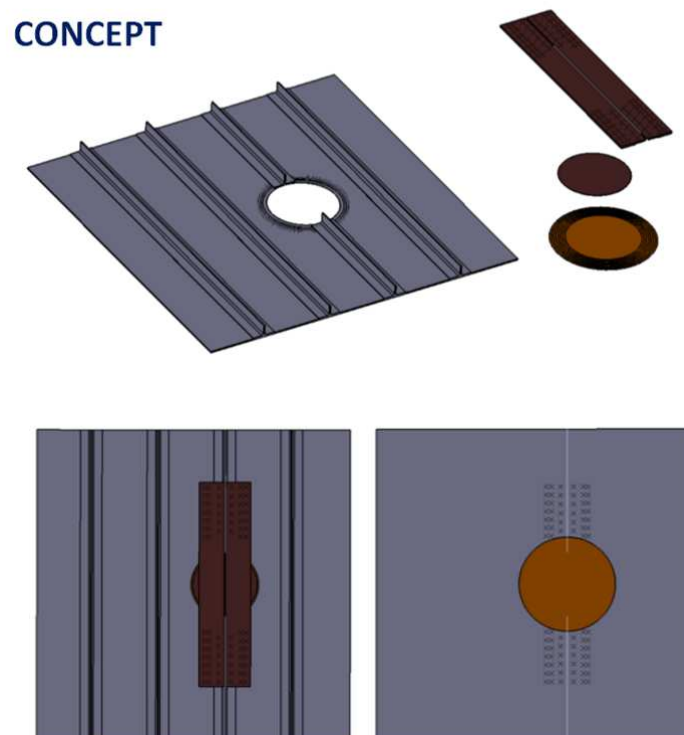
Layout of repair configuration in case external access (only through damage hole)
